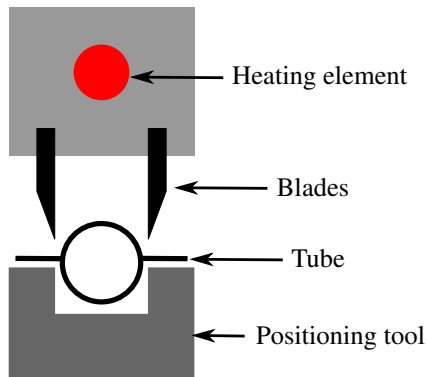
Schematic view of the hot cutting mechanism. The tube with the residual layer is placed into a positioning tool. Blades are heated over a heating element to the glass transition temperature and pressed down, cutting and melting the residual layer at the same time, leading to a separated tube with welded bond areas.⁹⁰
